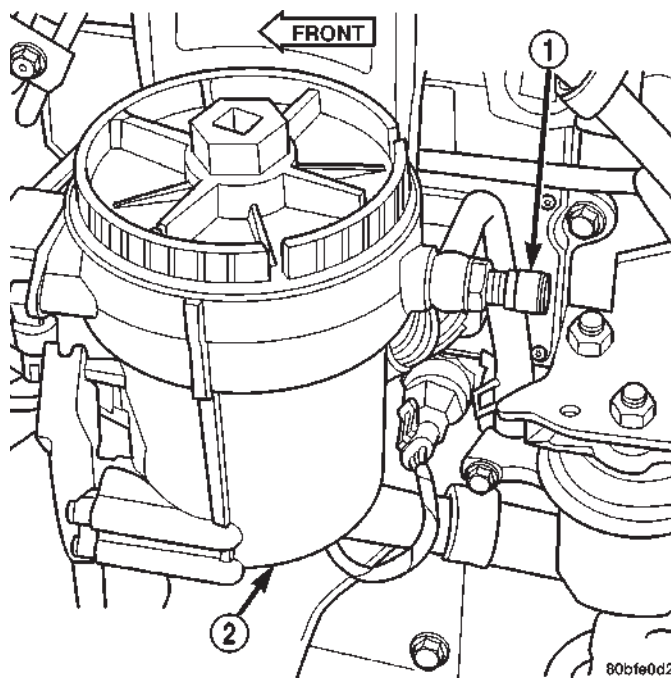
Fuel Pressure Test Port Fitting (Inlet)
